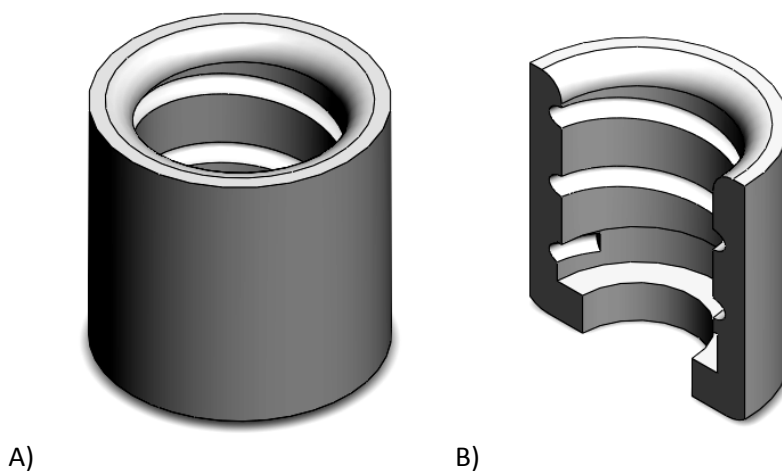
Images of the threaded cap for transdermal osseointegrated implantable device: A) top/side isometric view, B) top/side isometric view – cutaway, dimensions: 12 mm outer diameter and 10.5 mm height.
